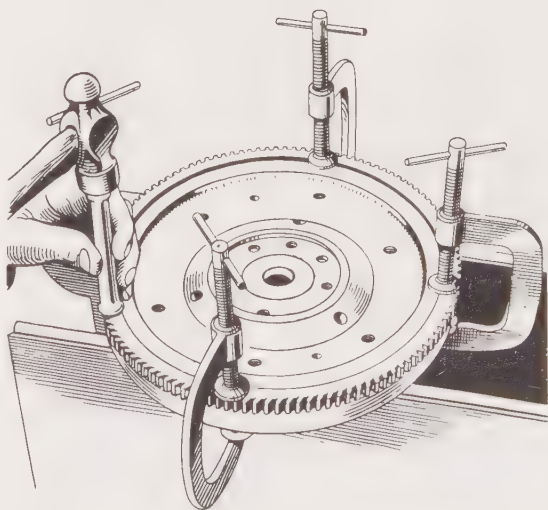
22 Method of replacing starter gear-ring on flywheel.
